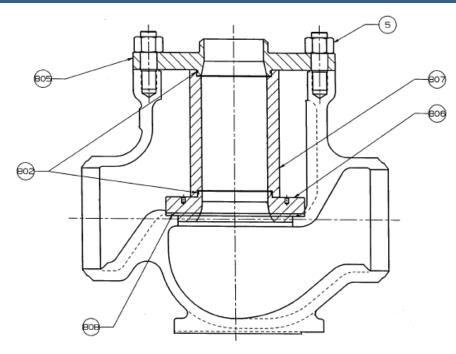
OUTLET BLOW DOWN ASSEMBLY
